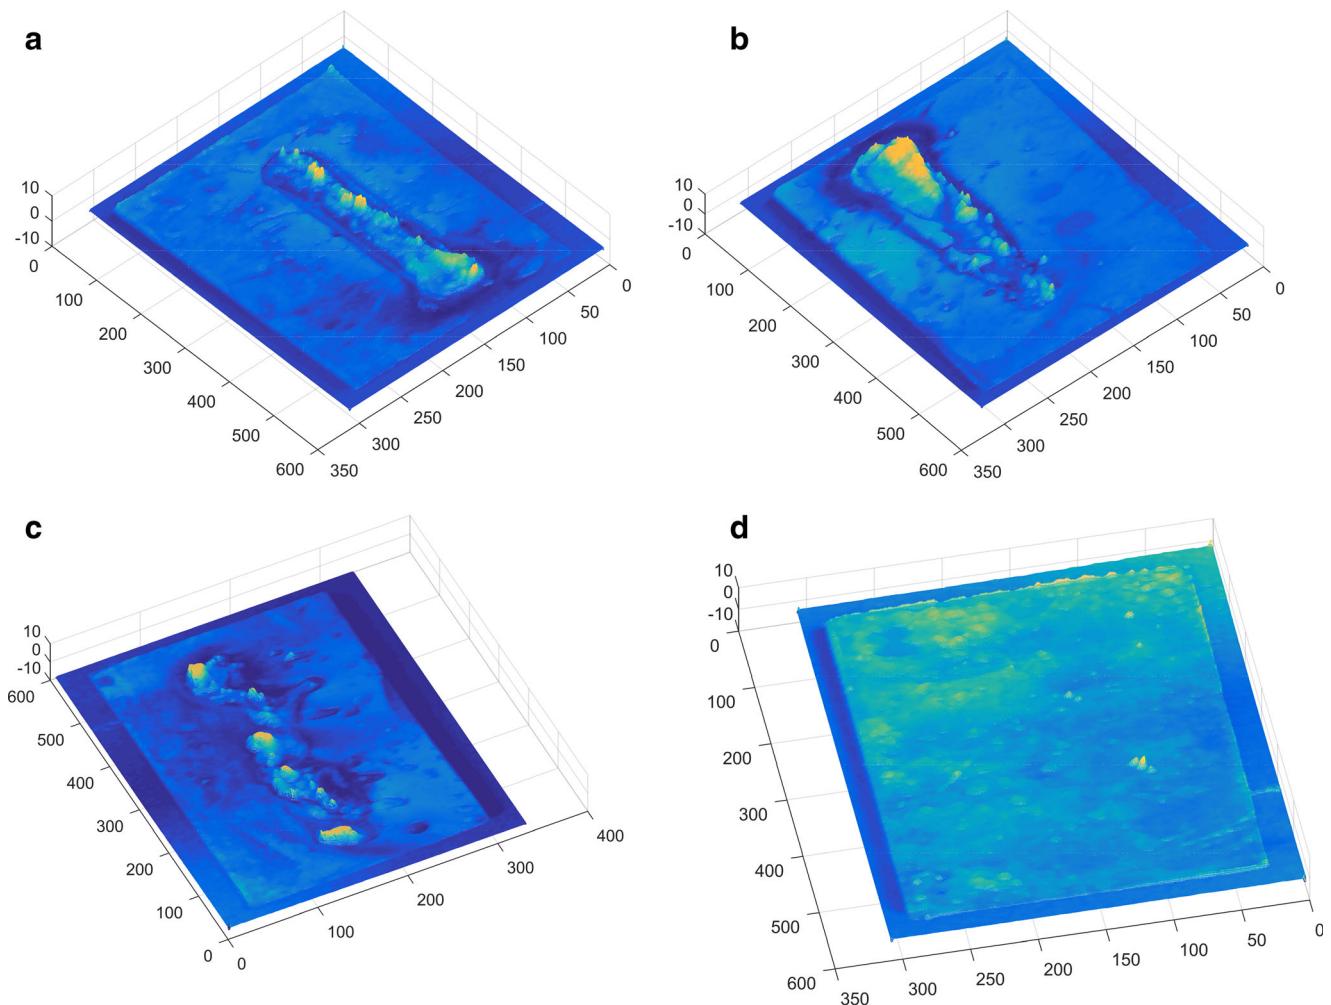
The 3D Reconstruction of different welds. a Integrity weld. b Inadequate penetration. c Incomplete fusion. d Workpiece
